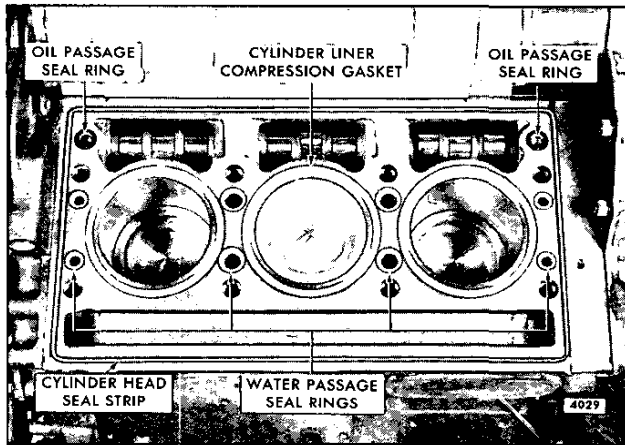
Cylinder Head Gaskets and Seals in Place on Cylinder Block
